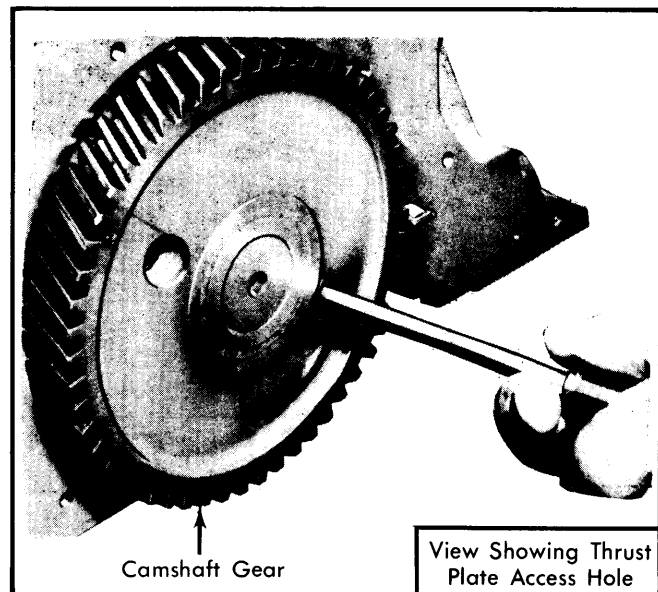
Removing Thrust Plate Screw with Screwdriver Inserted Through Timing Gear
